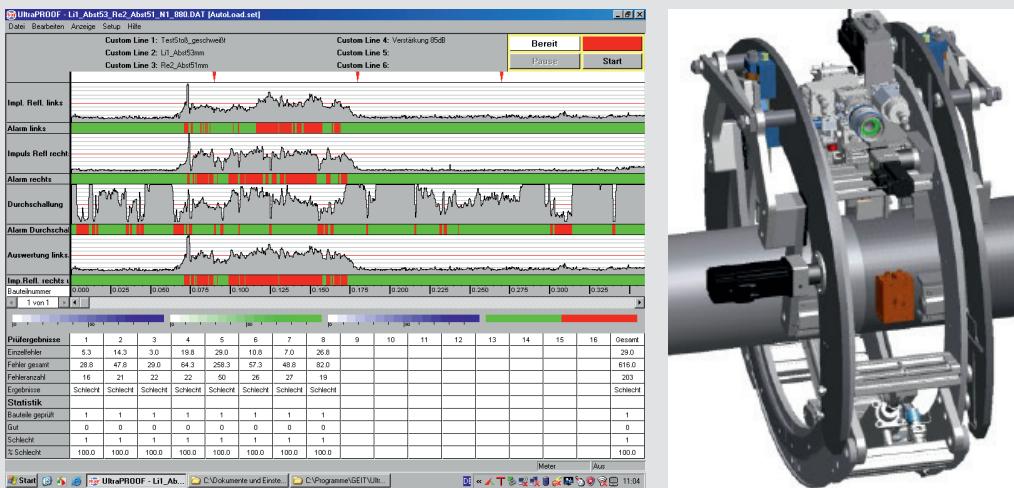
Automated laser beam welding with documentation of the weld test
